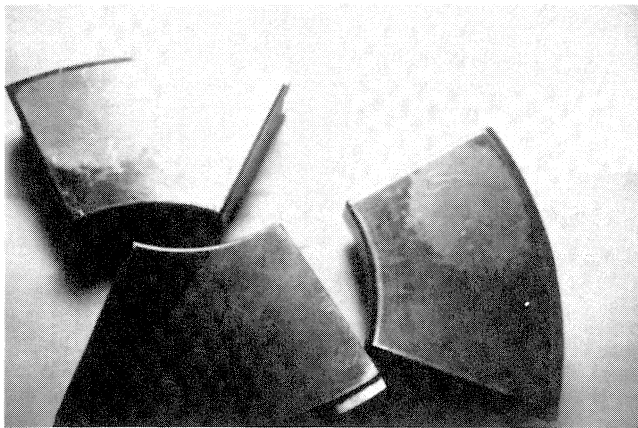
Thrust Bearing Damage, Ashland Oil Company.
